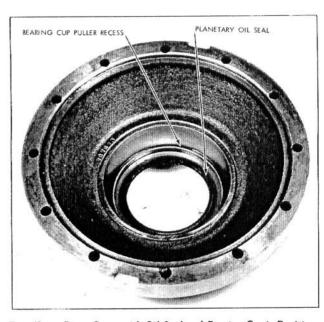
Drive Cover with Oil Seal and Bearing Cup in Position
